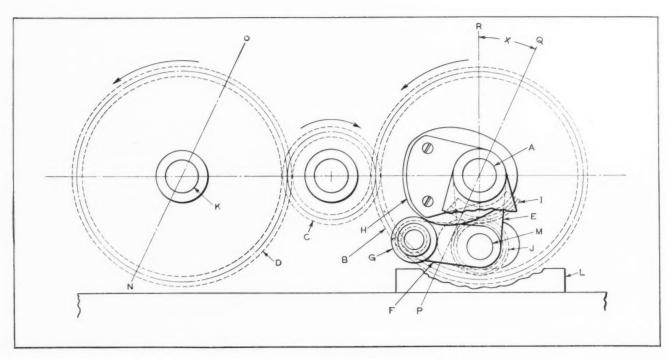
Diagram Showing Mechanism in Fig. 1 after Shaft A has Rotated 180 Degrees
